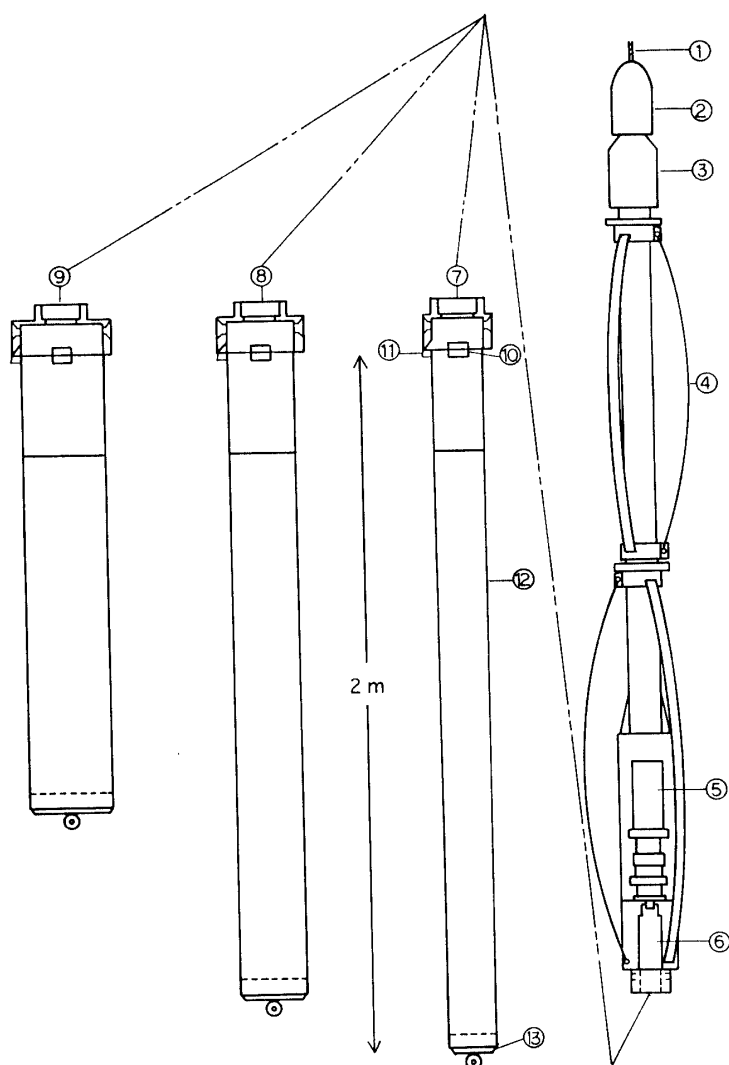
Cross-sectional drawing of the electro-mechanical reamer.
